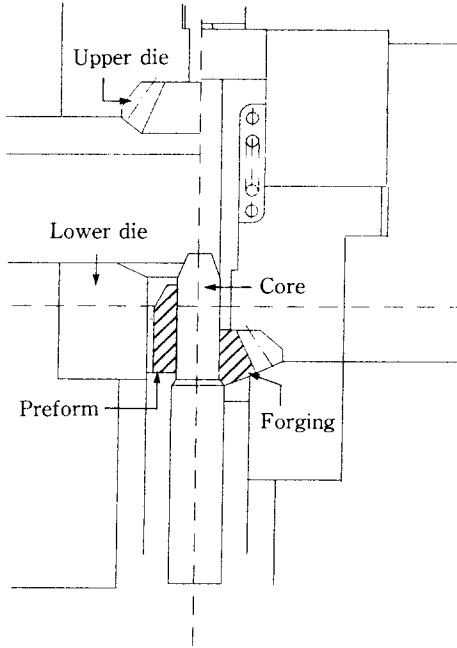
A schematic view of closed-die forging of a bevel gear; left-view and right-view present the initial and the final stages of the process, respectively
